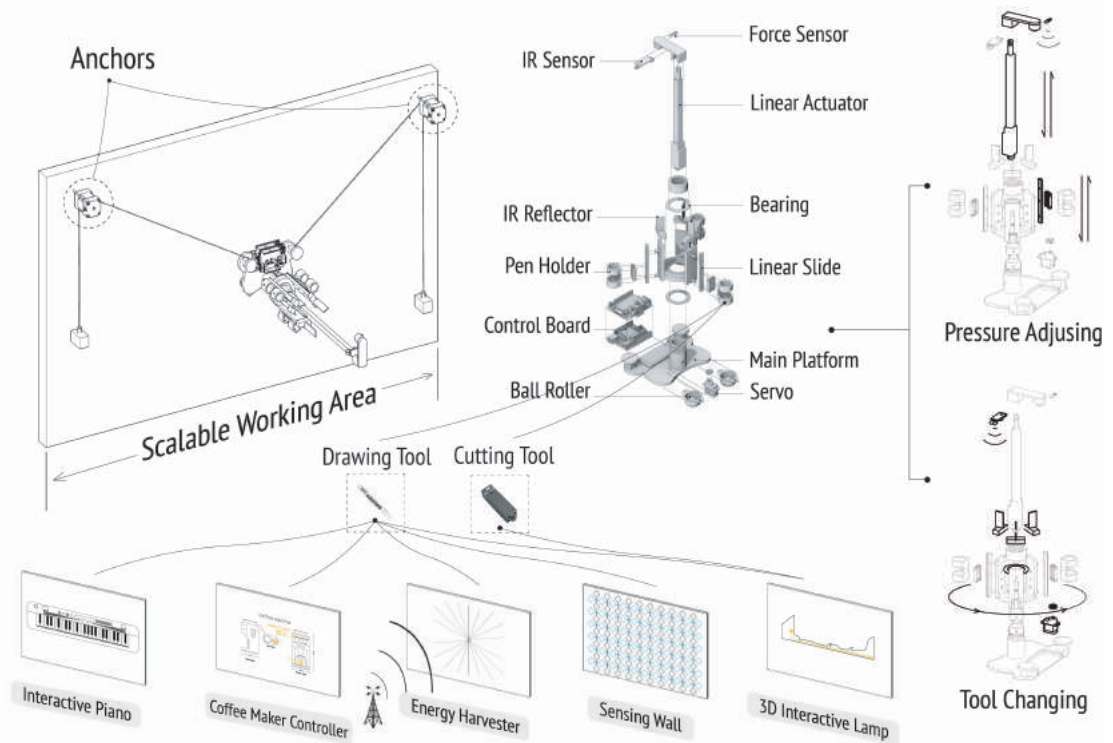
Demonstration of the hardware design: Top-left: Overview of the system. Middle: The explosion view of the drawing platform. Top-right: Two highlighted functions designed for circuit fabrication. Bottom: Highlighting drawing tools and cutting tool with associated applications.
